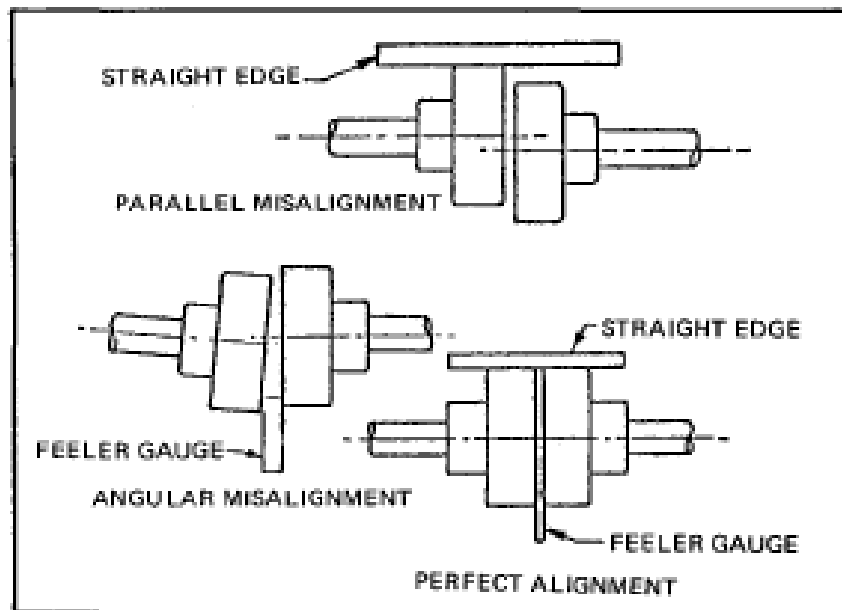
TESTING ALIGNMENT, STRAIGHTEDGE
